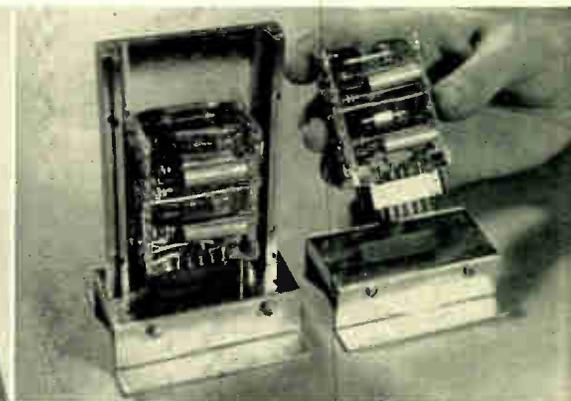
Following assembly, the electronic circuit is tested for operation and is then prepared for the molding process that makes it a complete unit. The connector-base of the circuit assembly is placed in a wax plug in the baseplate of the mold. This holds the unit rigid while the liquid filler is being poured and also prevents the connector points from becoming fouled in the plastic. At left, the unit and one half of the mold is in place for pouring; the mold is held by a C-clamp.
